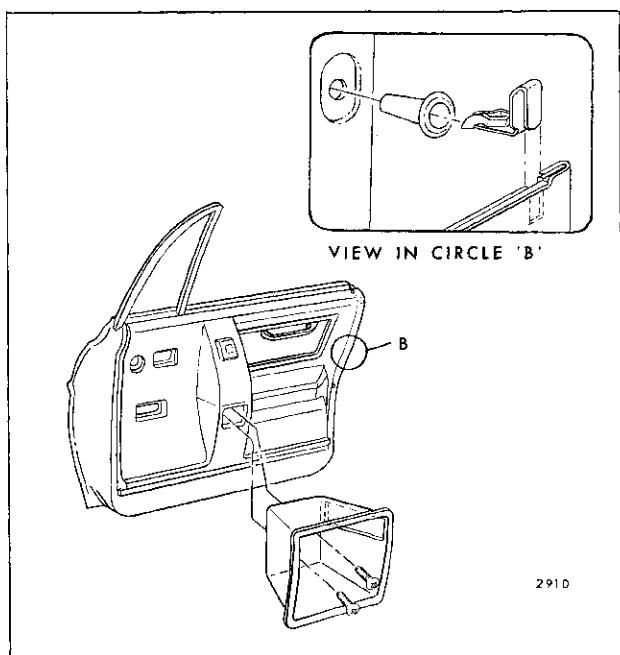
Door Trim Assembly with Integral Arm Rest - Pontiac Shown, Cadillac Similar
